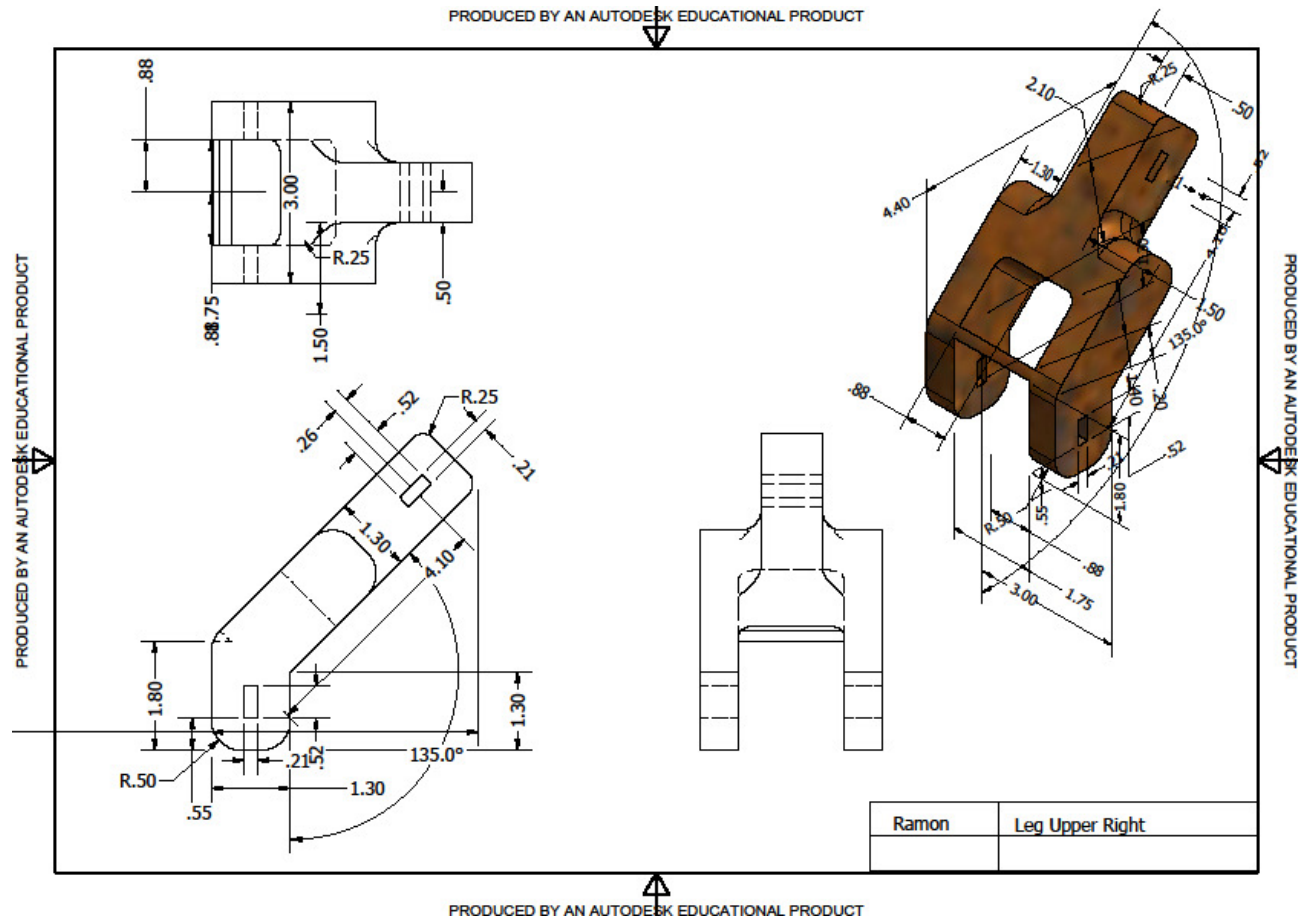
CAD drawing of the Upper Right Leg of the 6-DOF sensor.
